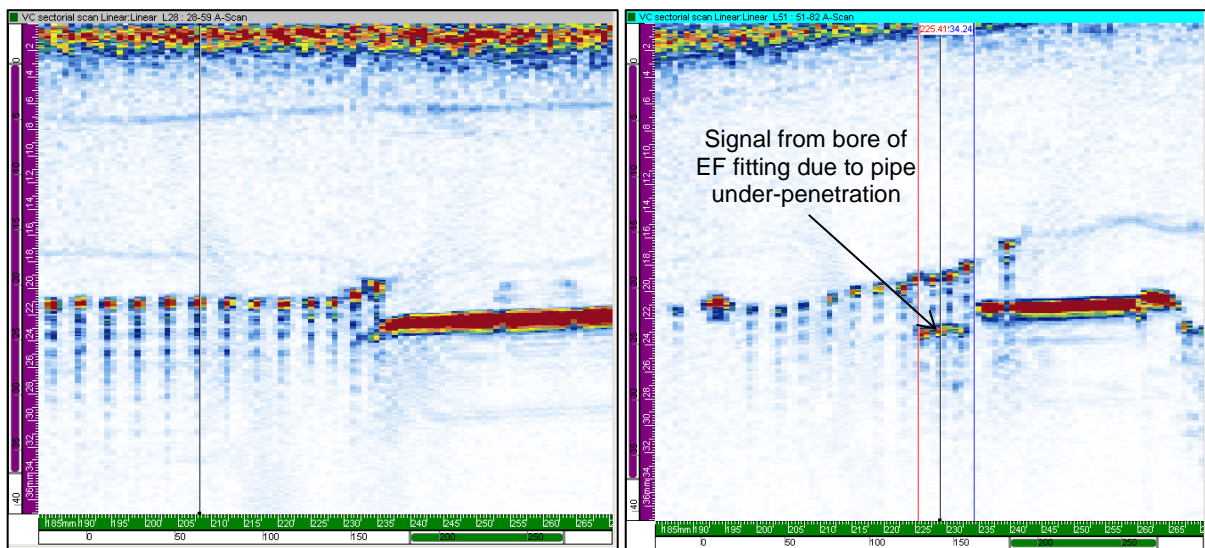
B-scan images of electrofusion welds in 225mm PE pipes: unflawed weld (left), and weld with pipe under-penetration level A (right).
